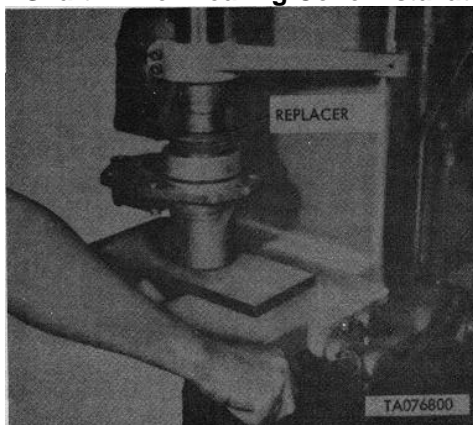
Roller Bearing Cup Pressed onto Pinion Gear Housing Using Replacer
